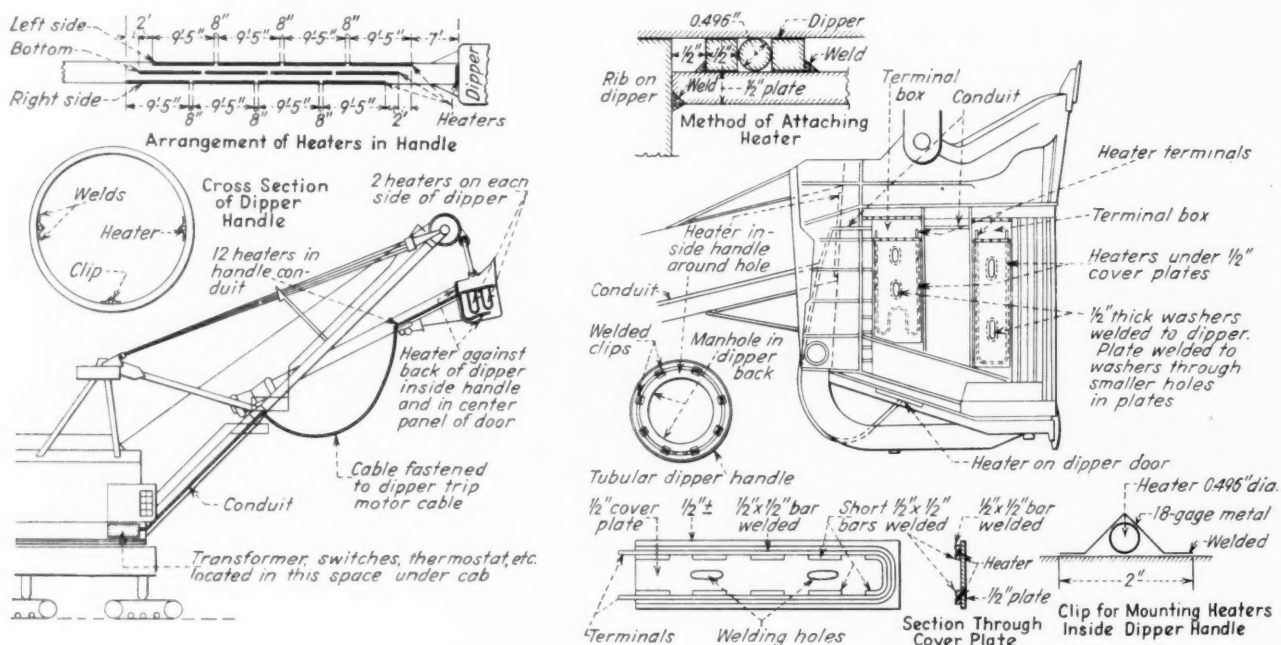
Showing (left) heater and wiring arrangement and (right) method of attaching and arrangement of heaters on dipper.
